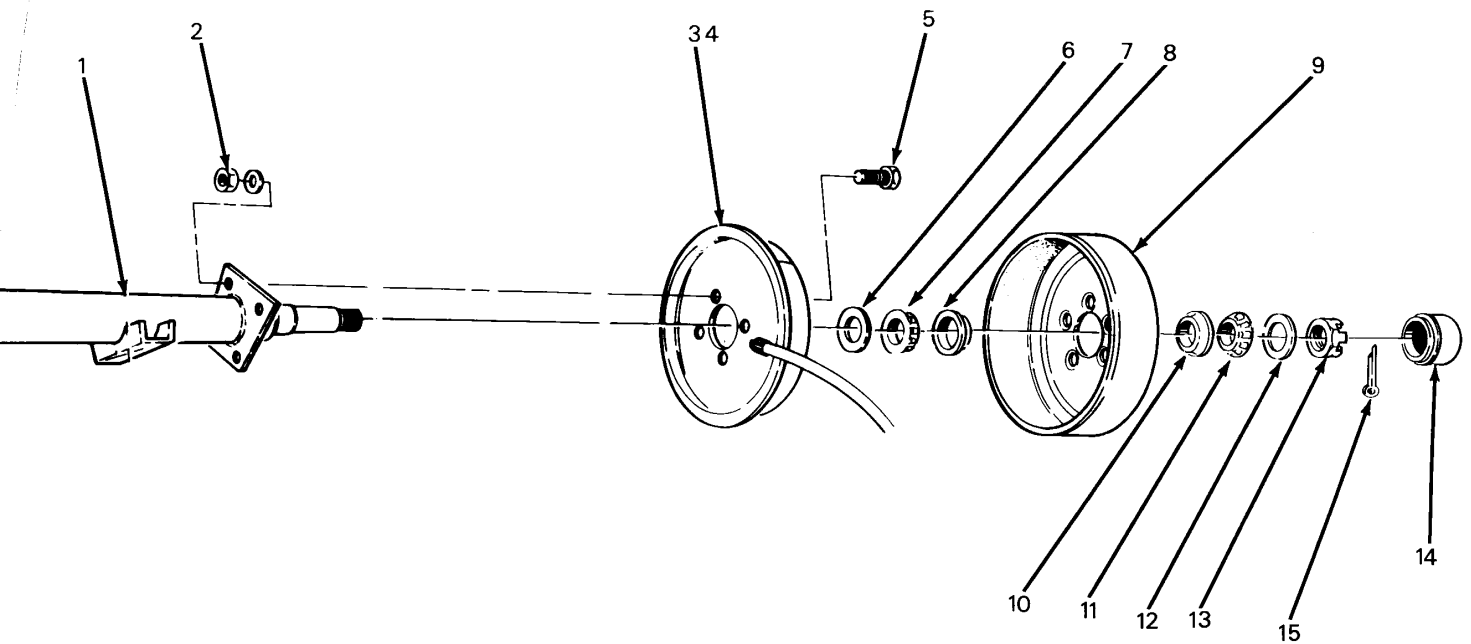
(Sheet 2 of 2) Axle and Brake Assembly
